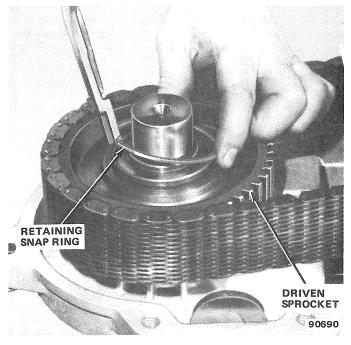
D-50 Driven Sprocket Retaining Snap Ring Removal/Installation
